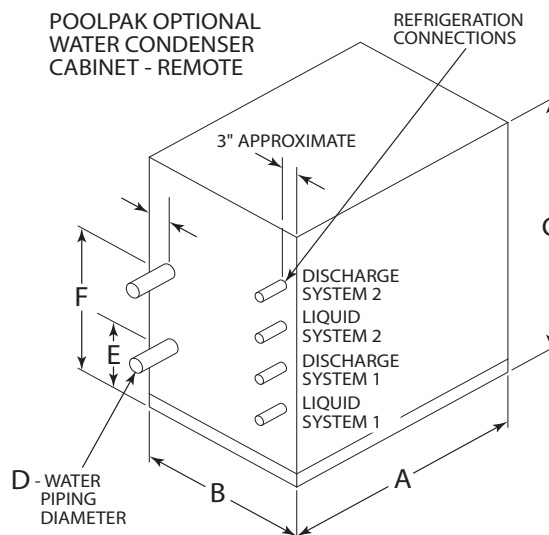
PoolPak Remote Water Cooled Condenser view
